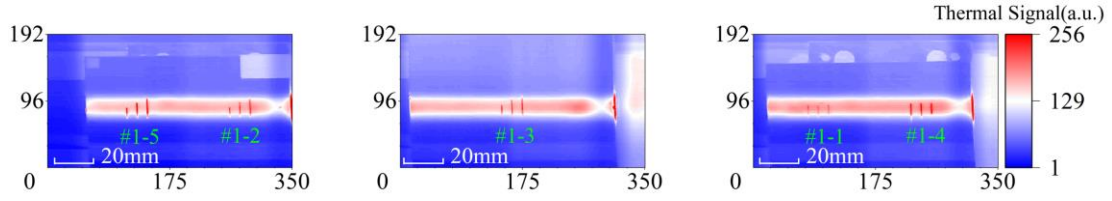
Reconstruction results of cracks on the front of Specimen #01.
